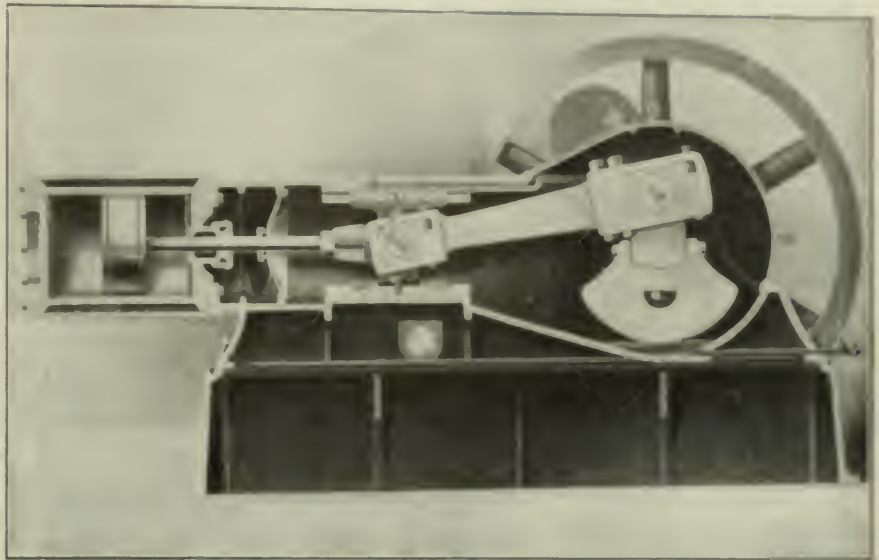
SECTIONAL VIEW OF "ERICCO" ENGINE
